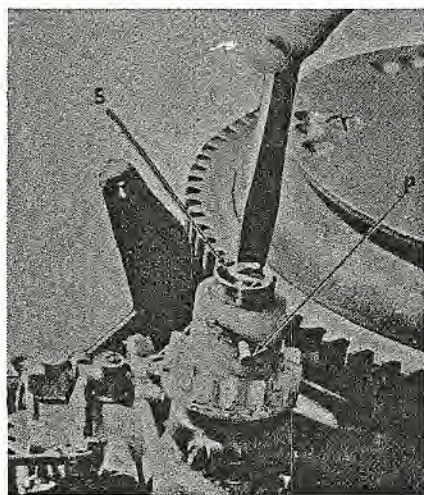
To disassemble the starter, first remove lock screw (S) and install the special tool before attempting to remove drive pin (P). Refer to text.
